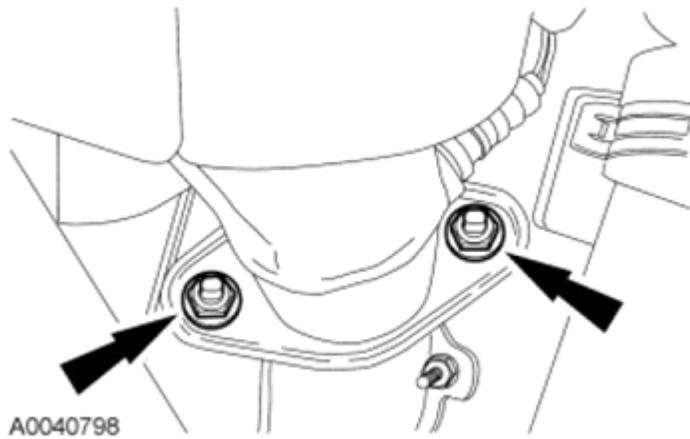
Locating Exhaust Manifold-To-Catalytic Converter Nuts
